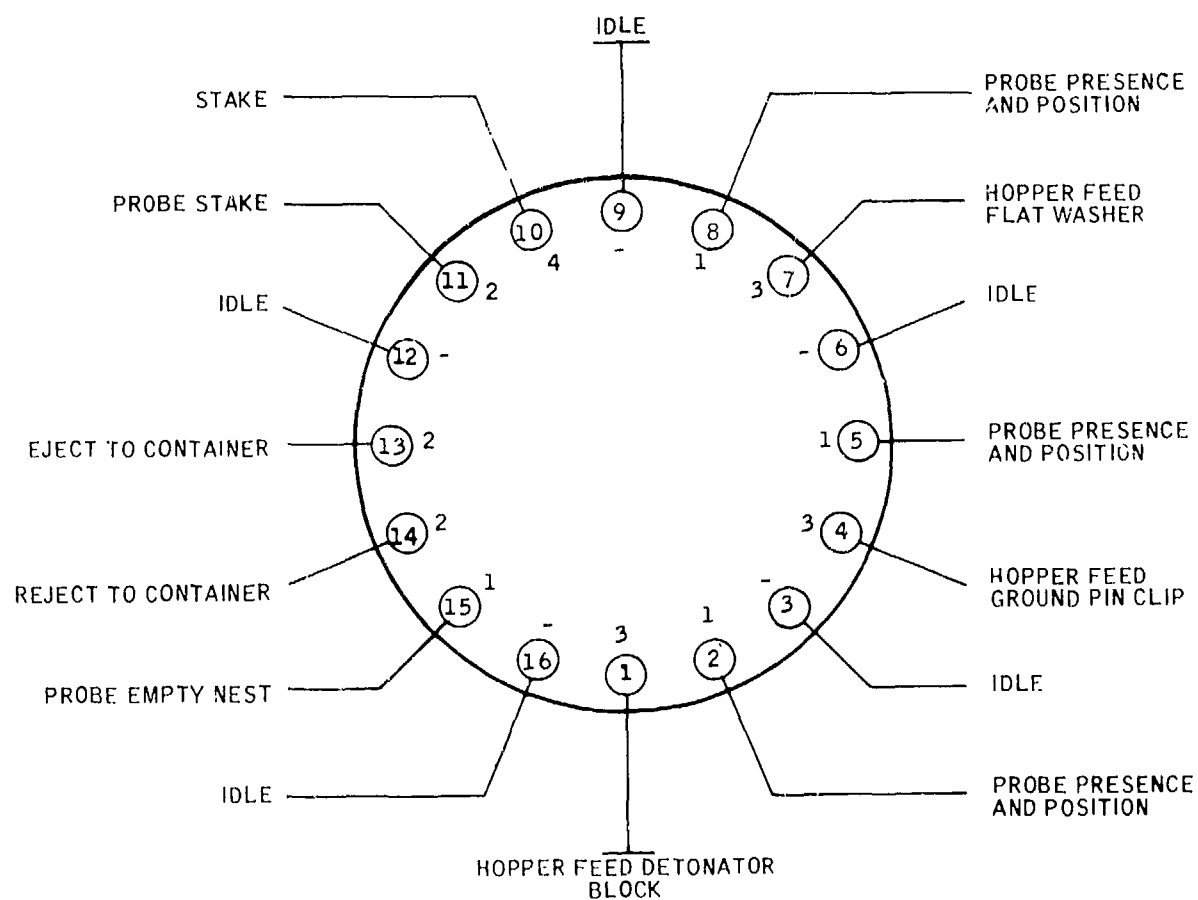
Dial schematic, machine F1 - detonator block assembly operation 1
